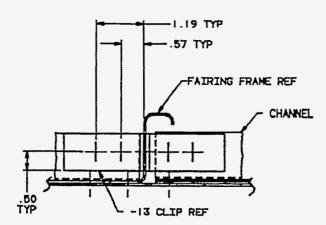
Sectional view of the wheel well Fairing. Button head fasteners are Not shown.
